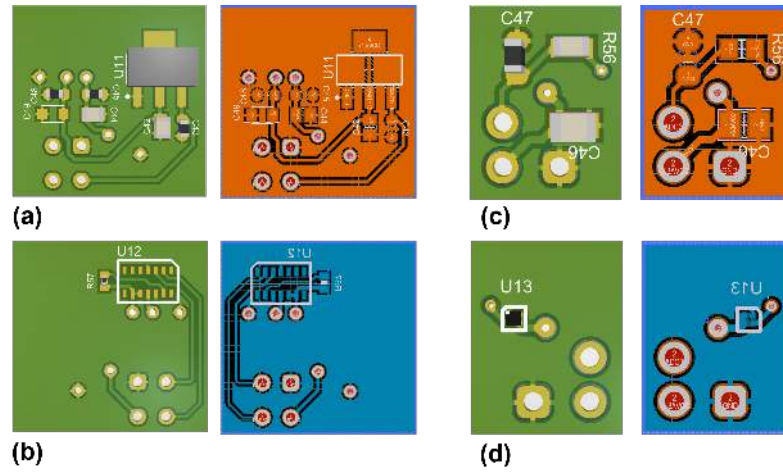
The front and back view of the PCBs containing the PPG system mounted on the main body, (a) front and (b) back faces, and the front and back view of the PCB containing the temperature sensor mounted on the main body, (c) front and (d) back faces.
